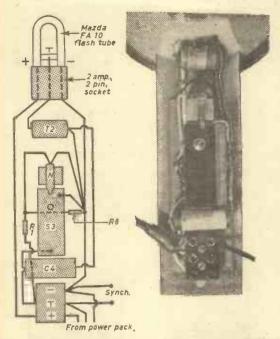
The layout and wiring of the main flash head. The components should be mounted on a piece of Perspex which is finally cemented to the front cover of the flash head.
